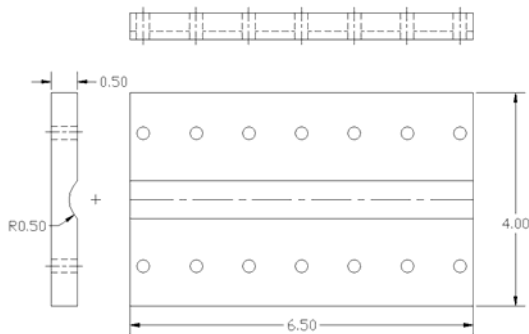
Circular Manifold View Plate (dimensions are in inches)
